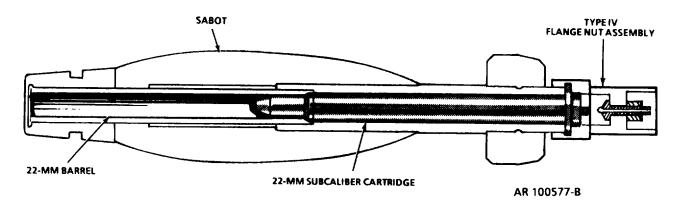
81 mm Sabot cross section showing 22mm cartridge in loaded position.
